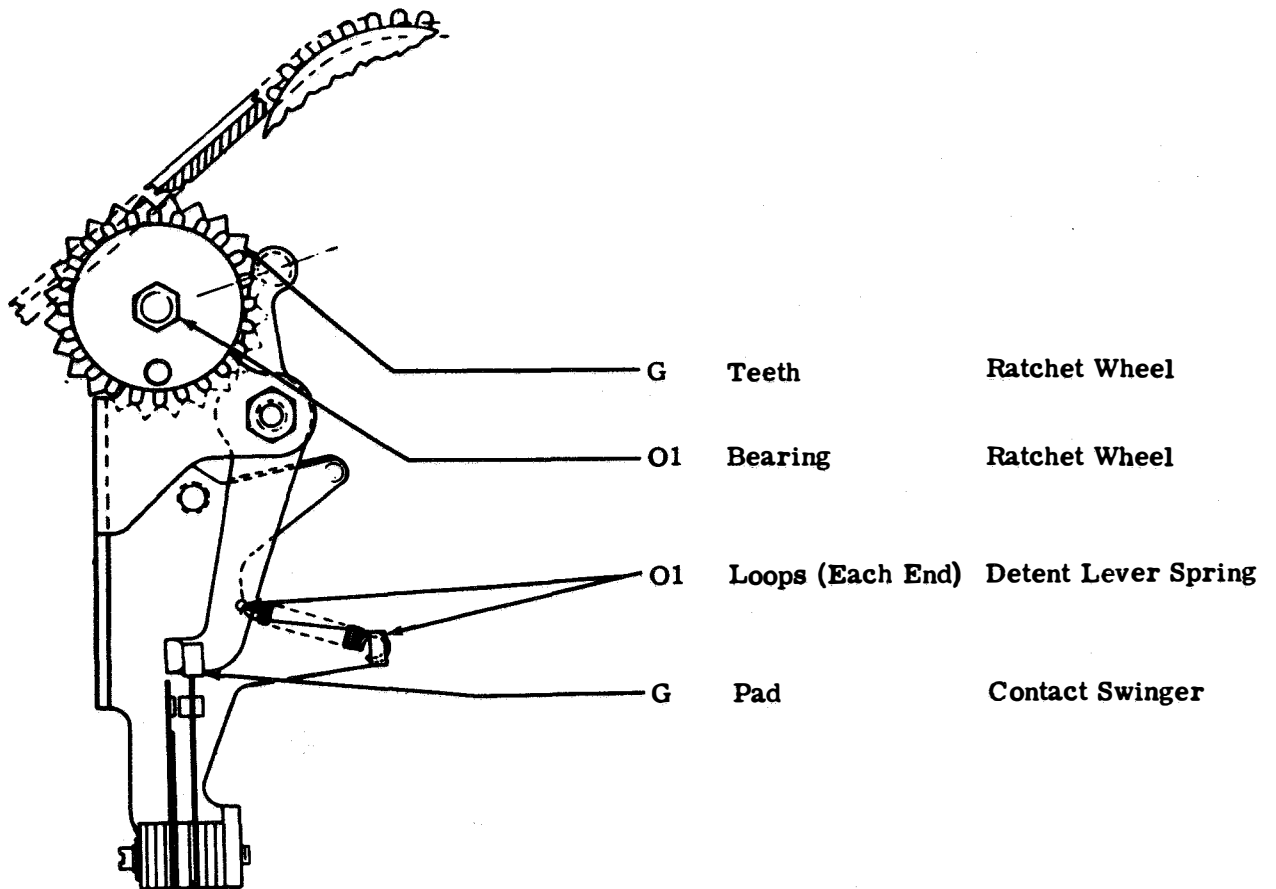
Tape Feed Assurance Mechanism, Rear View
